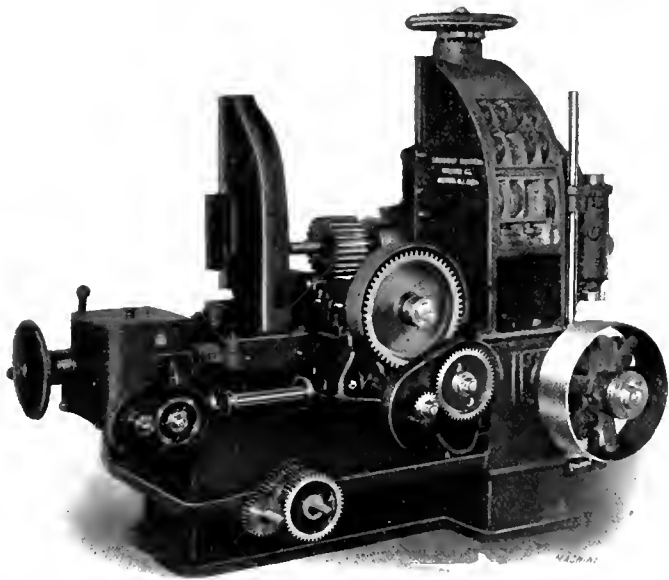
A Machine made by Eberhardt Bros. with Special Shortened Column; of Rugged Design for cutting Coarse Pitch Pinions.
